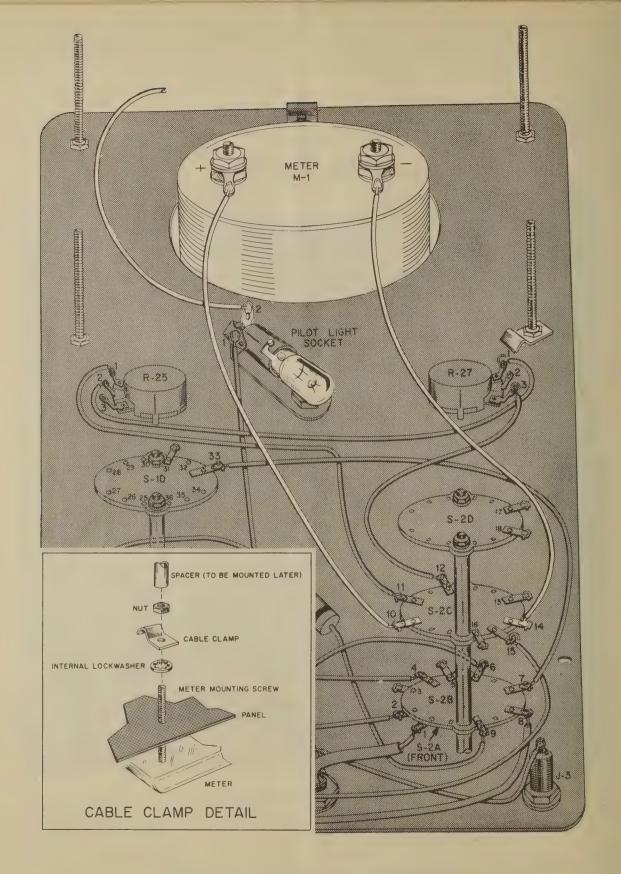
HOW TO MOUNT AND WIRE THE METER
